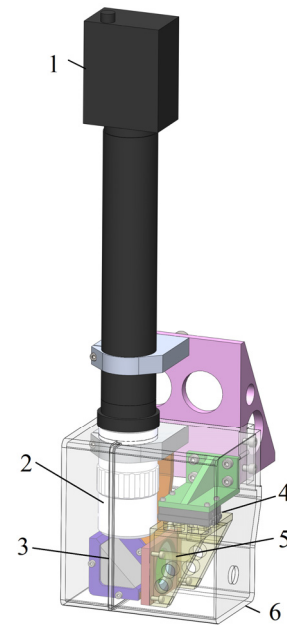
Z8-830400 camera assembly: (1) FLIR Integrated Imaging Solutions Inc. GS3-U3-120S6M-C camera, (2) Mitutoyo Co. 10X objective lens, (3) Edmund Optics Inc. #45-595 45° reflecting mirror, (4) SmarAct GmbH SLC-1730 linear stage, (5) scintillator holder, and (6) opaque cover.
